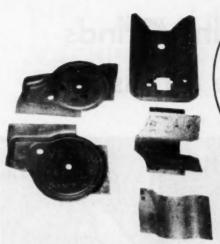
All at these five stampings are hot formed from 1/4-in. stock. They include two side plates, left, and other parts in which working might be too severe if done cold.
